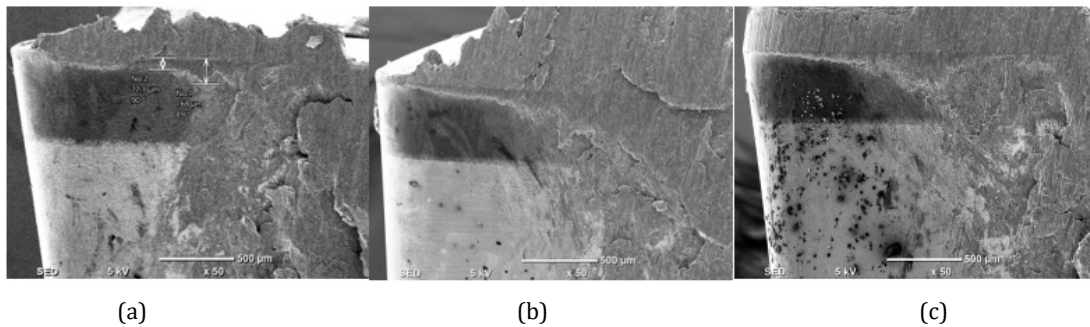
Tool wear when machining MMC: (a) 5 μm , (b) 10 μm , (c) 15 μm
